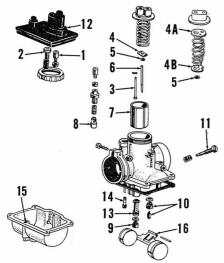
Exploded view of Mikuni VM carburetor. Spring guide (4A) and spring seat (4B) are used on A7 models.
